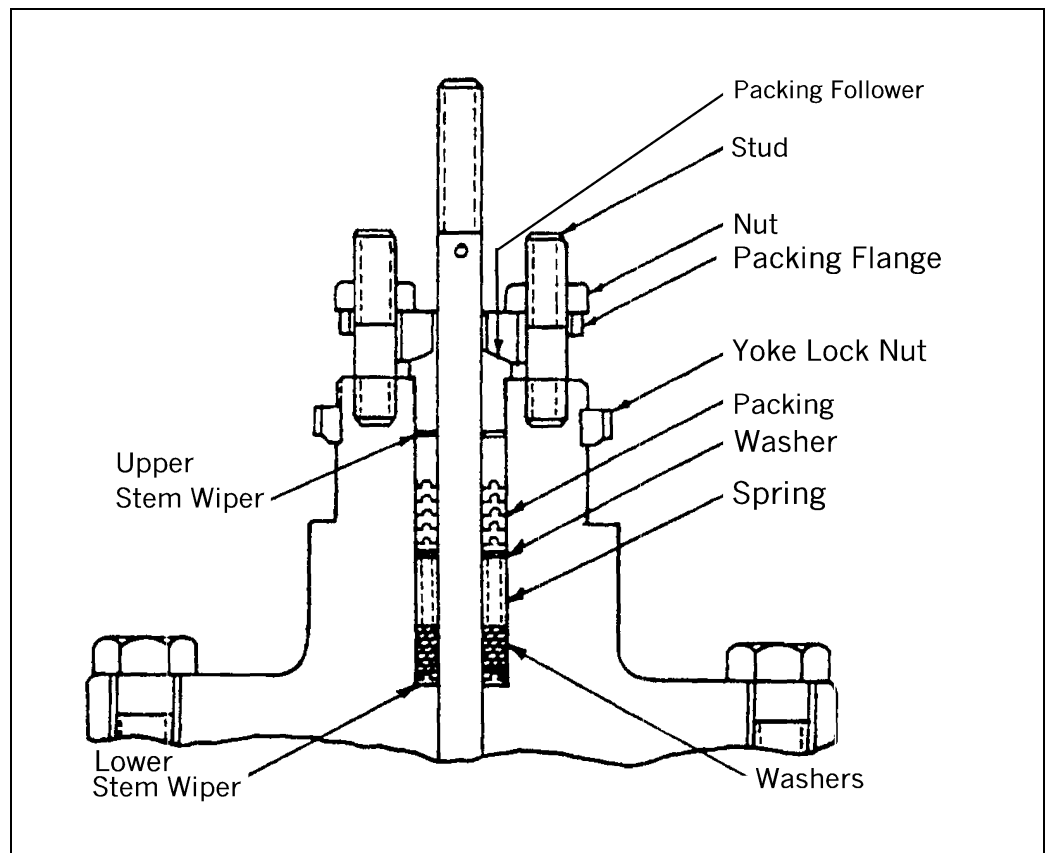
Spring-Loaded Teflon Packing (8" Valves)
